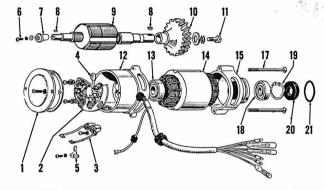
Exploded view of EN09 type alternator. Others are similar in construction.
